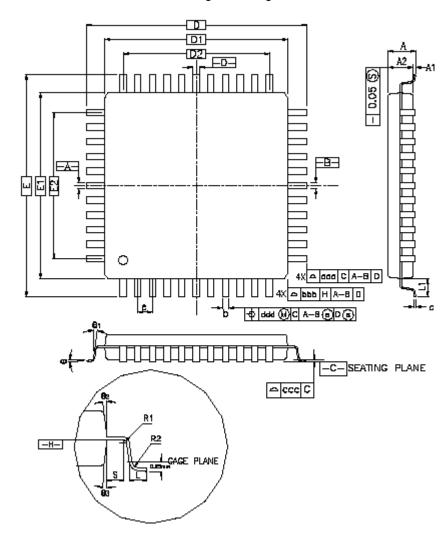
64- and 48-lead LQFP Package Drawing
